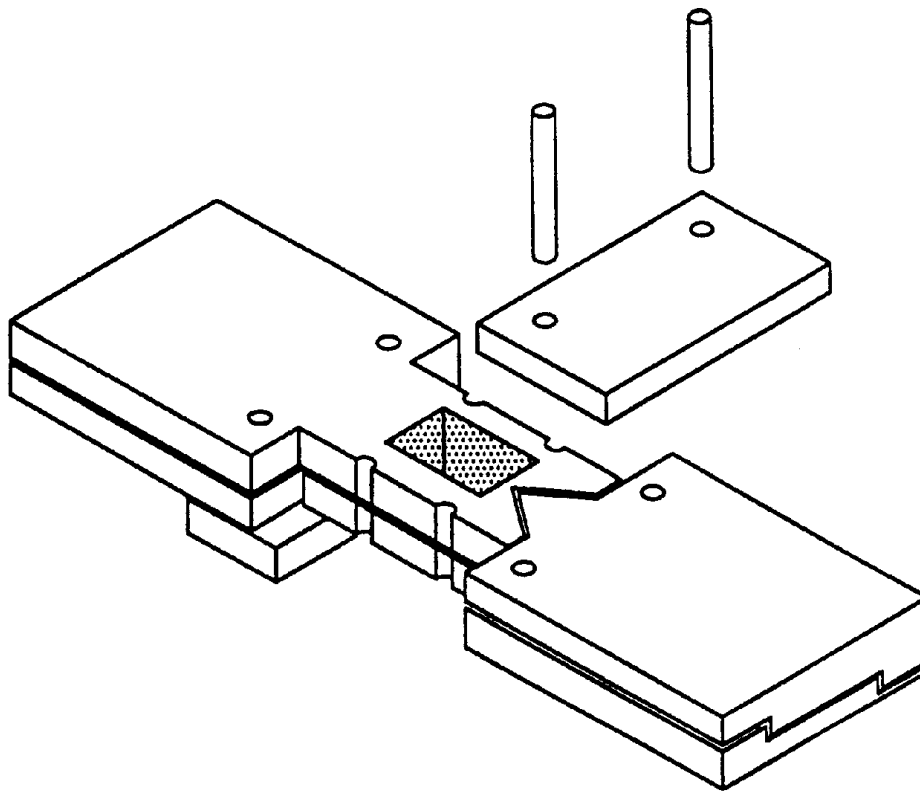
(b) *Open hole compression fixture assembly (Reference 7.2.6.3).
